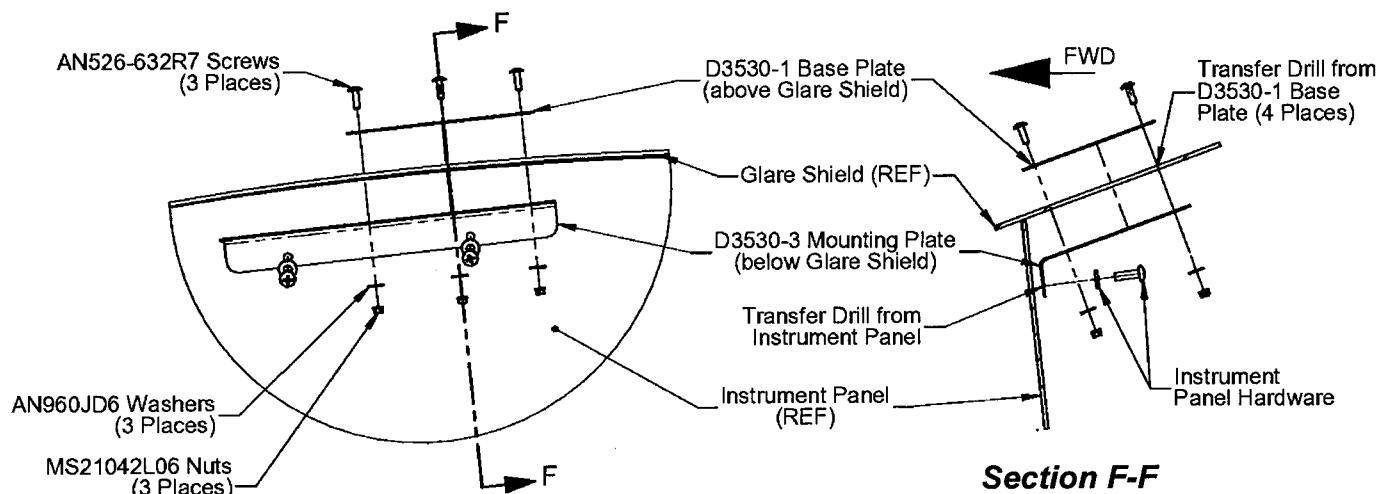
D3530-1 Base Plate and D3530-3 Mounting Plate Installation
